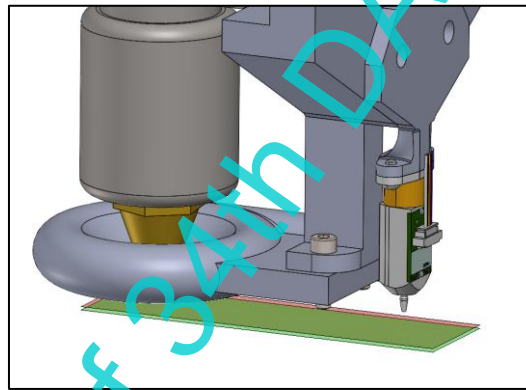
Mounting point on the Noztek Xcalibur extruder using a 3D-printed plate
